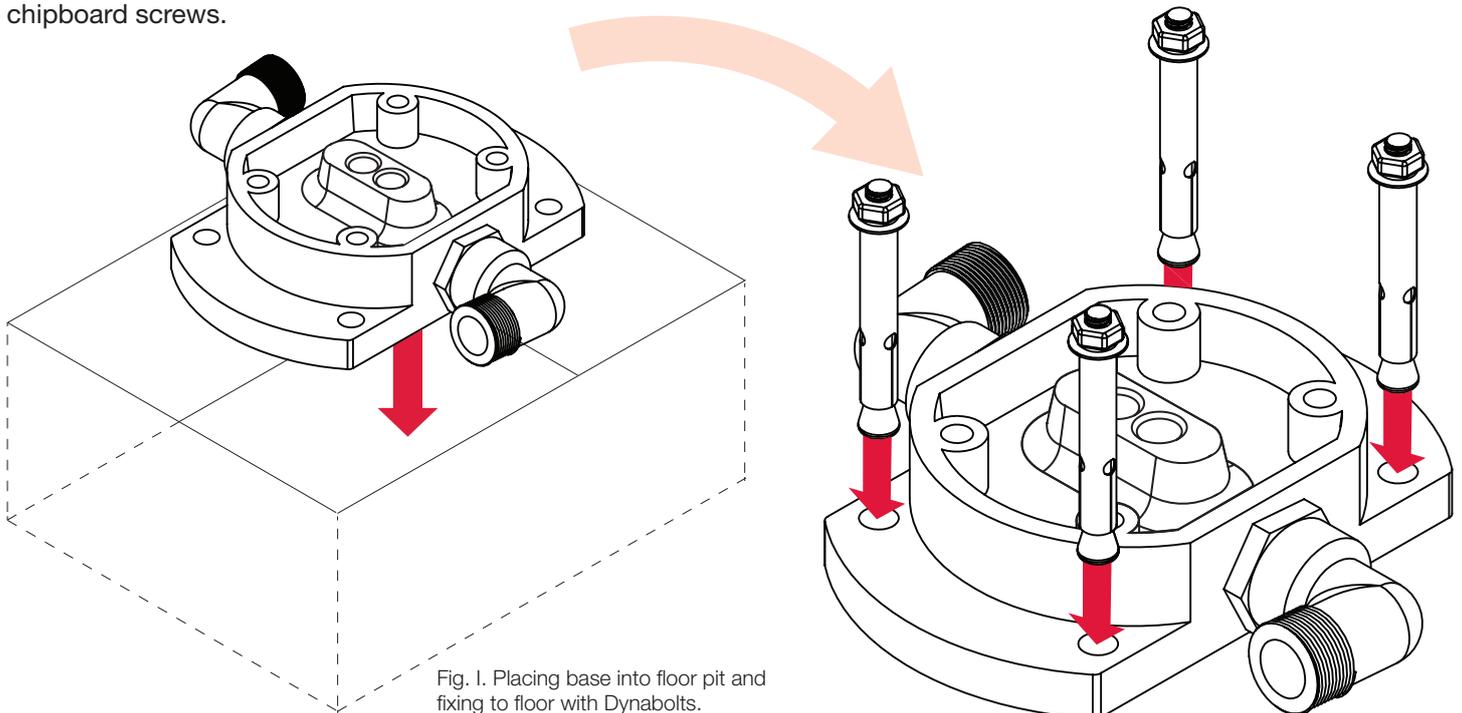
Fig. I. Placing base into floor pit and fixing to floor with Dynabolts.
